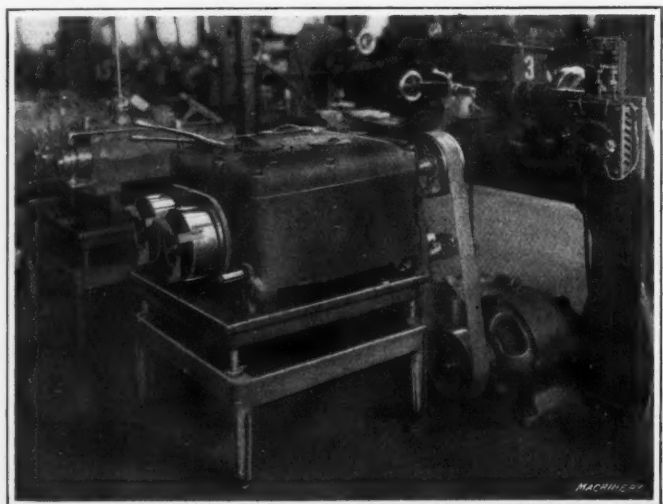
Stand located by Cleats on Floor to align Headstock and Motor
